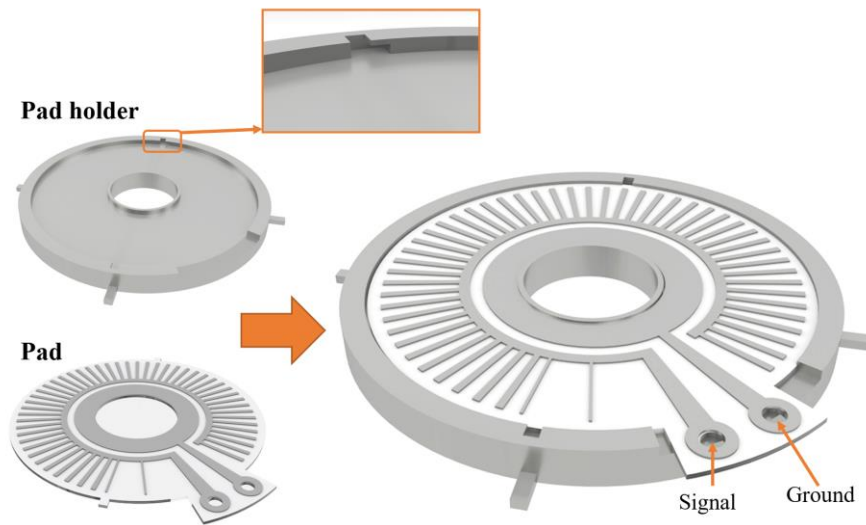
3D plots of the digital encoding pad and pad holder in Design I. The pad is made by a ceramic printed circuit board (PCB). The pad holder is made of stainless steel.
